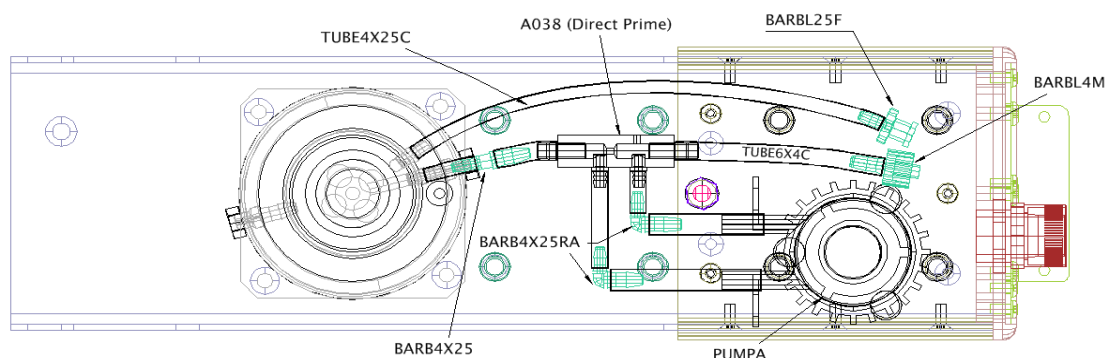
TZ34 , TZ54 and TZ72 Ink system tubes and fittings
